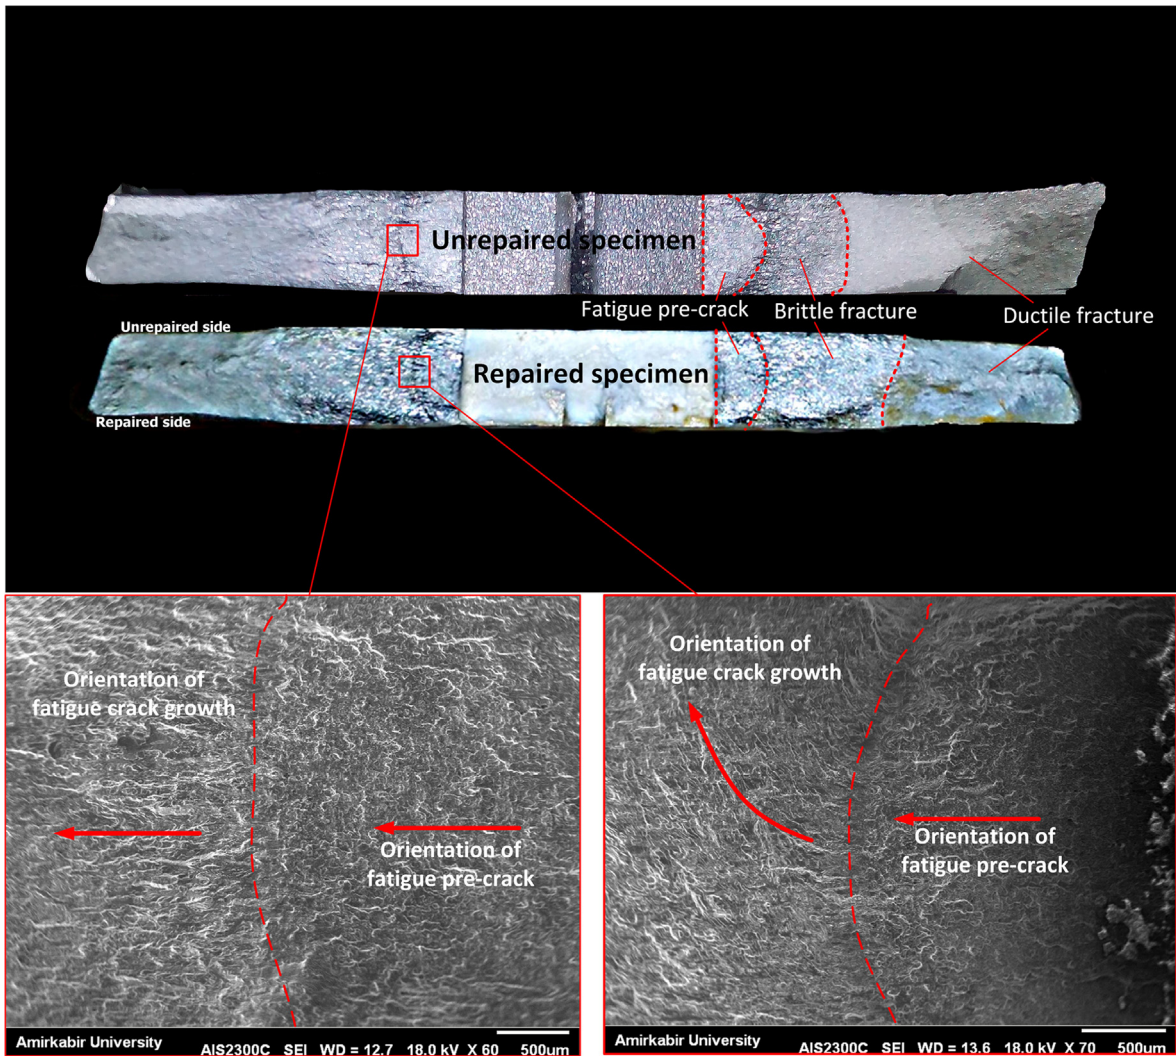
The fracture surface of the unrepaired and repaired specimens.
